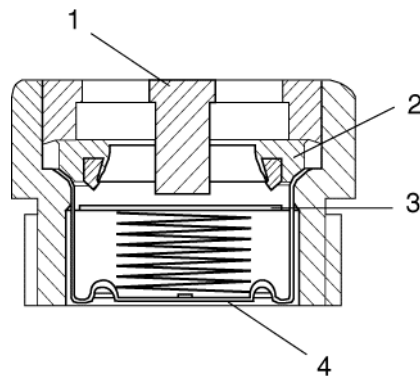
Sectional view of the auxiliary air valve, for legend see [Table 13](#)
